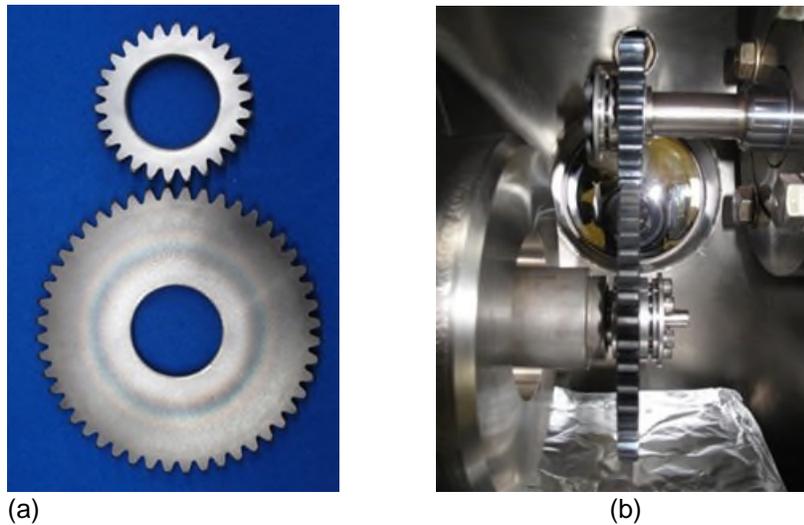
Test gears. (a) Just prior to testing. (b) Installed in rig just prior to closing of test chamber.
